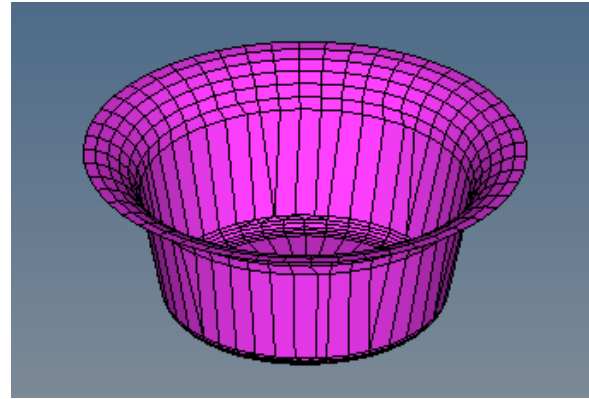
Die, Blank, Binder and Punch after first stage Tool Setup
